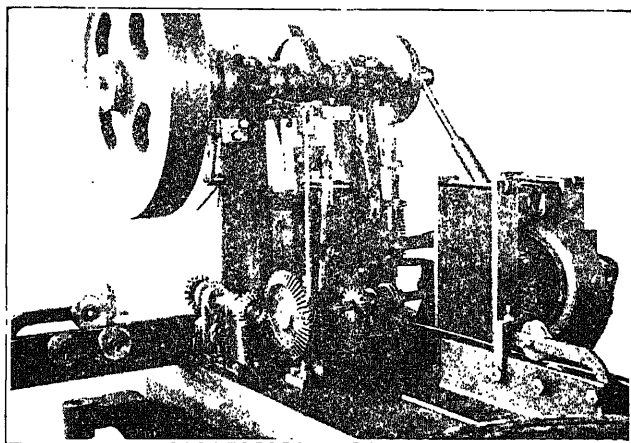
Partial Rear View of Hog-Ring Machine.
